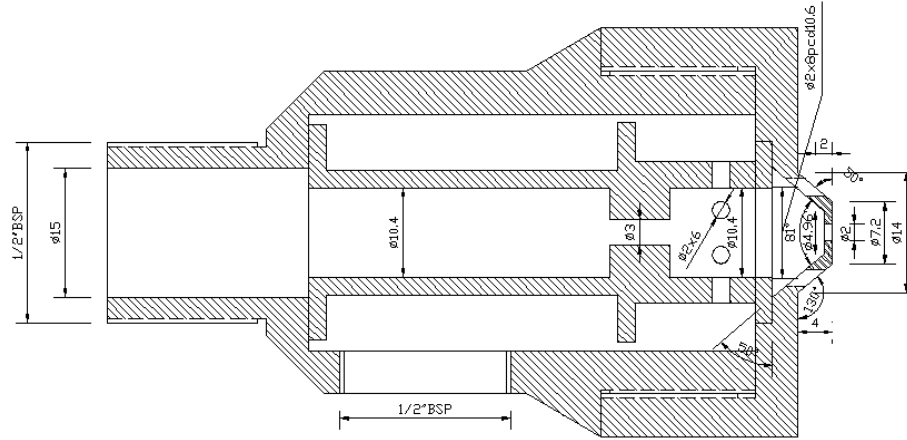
Sectional view of internally mixed atomizer assembly.
